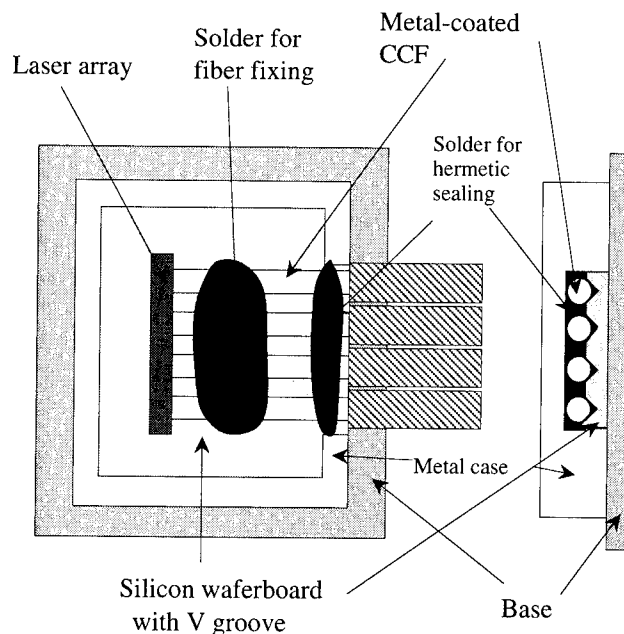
Schematic view of laser diode housing. Metal coated CCFs are fixed by soldering.
